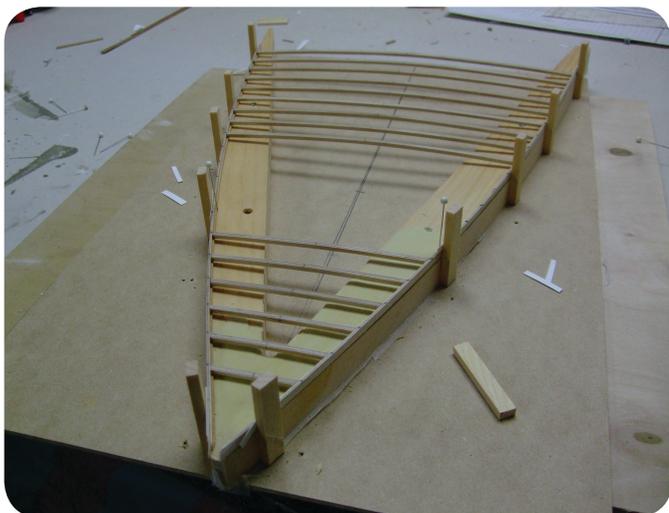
The same form used for the bulwarks was used to laminate 1/16th plywood strips to build the side beams for the ceiling framing.
